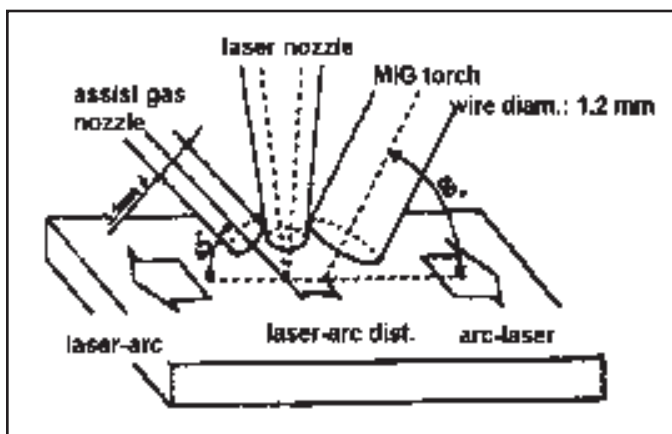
Arc-laser or laser-arc arrangement with respect to welding direction (Ref. 8).
